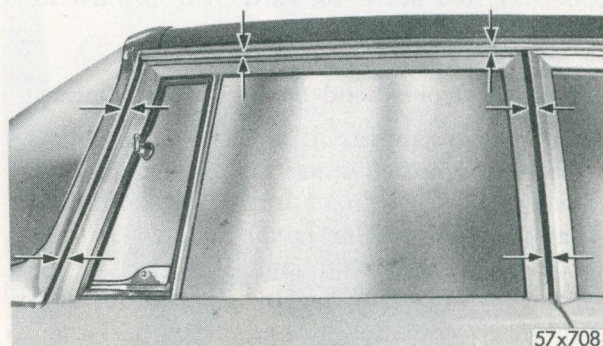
Aligning Upper Door Glass Frame to Hoodline and Rear Door
